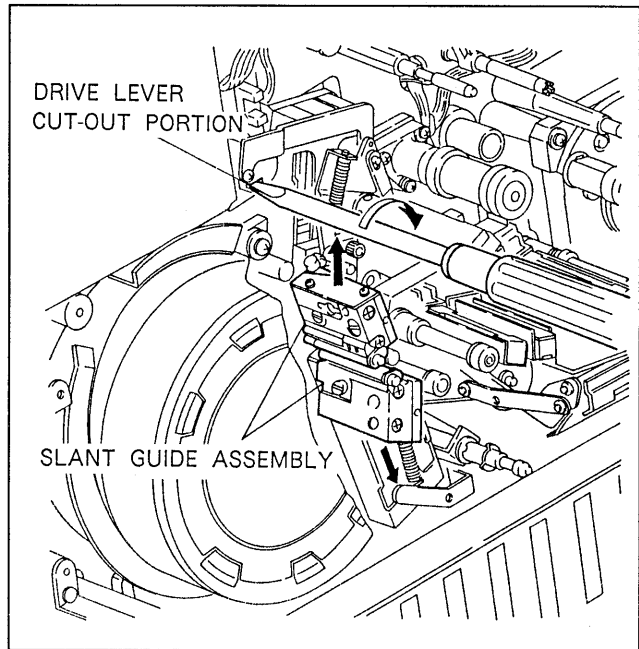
Movement of Entrance/Exit Slant Guide Assembly
